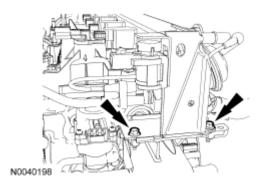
Locating AIR Valve Electrical Connector Courtesy of FORD MOTOR CO.
